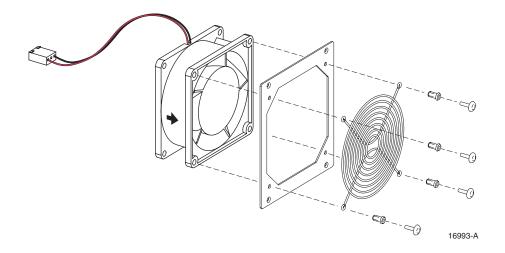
Removing STM Fan From Mounting Plate and Grill
